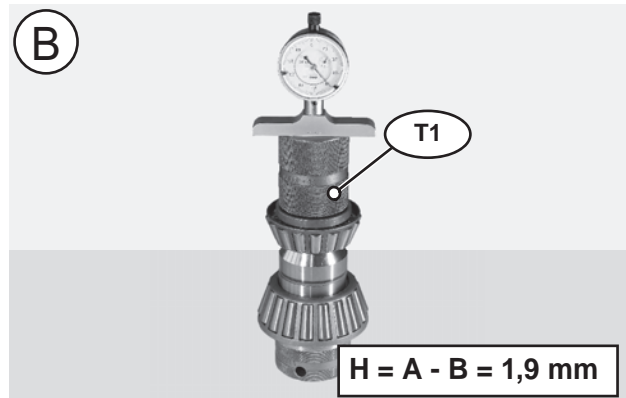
Introduce the dial indicator into either side hole of tool T1 (See drawing T1 p. 64). Reset the comparator with a preload of about 3 mm.
